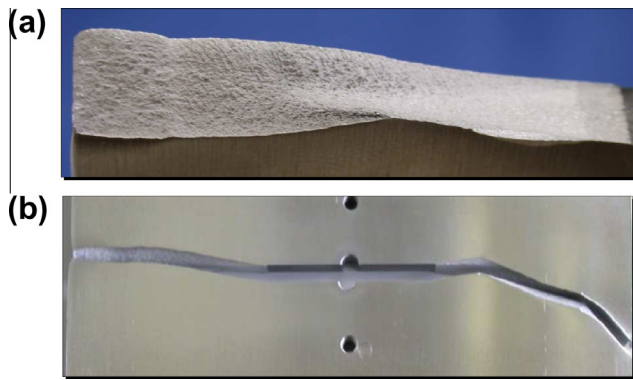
Typical aspect of a slanted crack: (a) twisted fracture surface and (b) tilted crack on the side surface.
